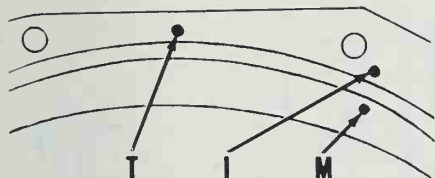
Drawing of flywheel timing marks used on some models.
